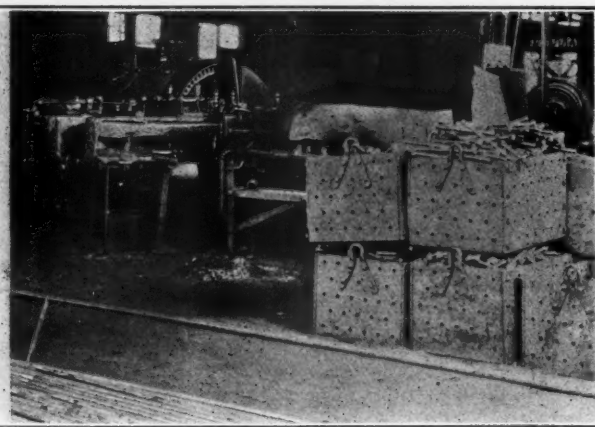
STEEL BOXES FILLED WITH BOLTS AND READY TO BE TRANSFERRED TO THE MACHINE SHOP.
